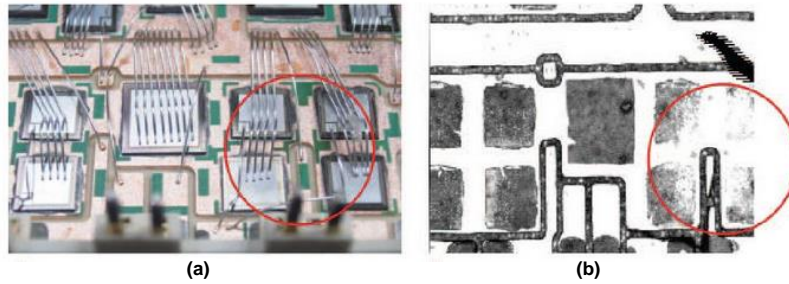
Chip Solder Fatigue caused by power cycling (a) Photograph and (b) Ultrasound Image [28]
